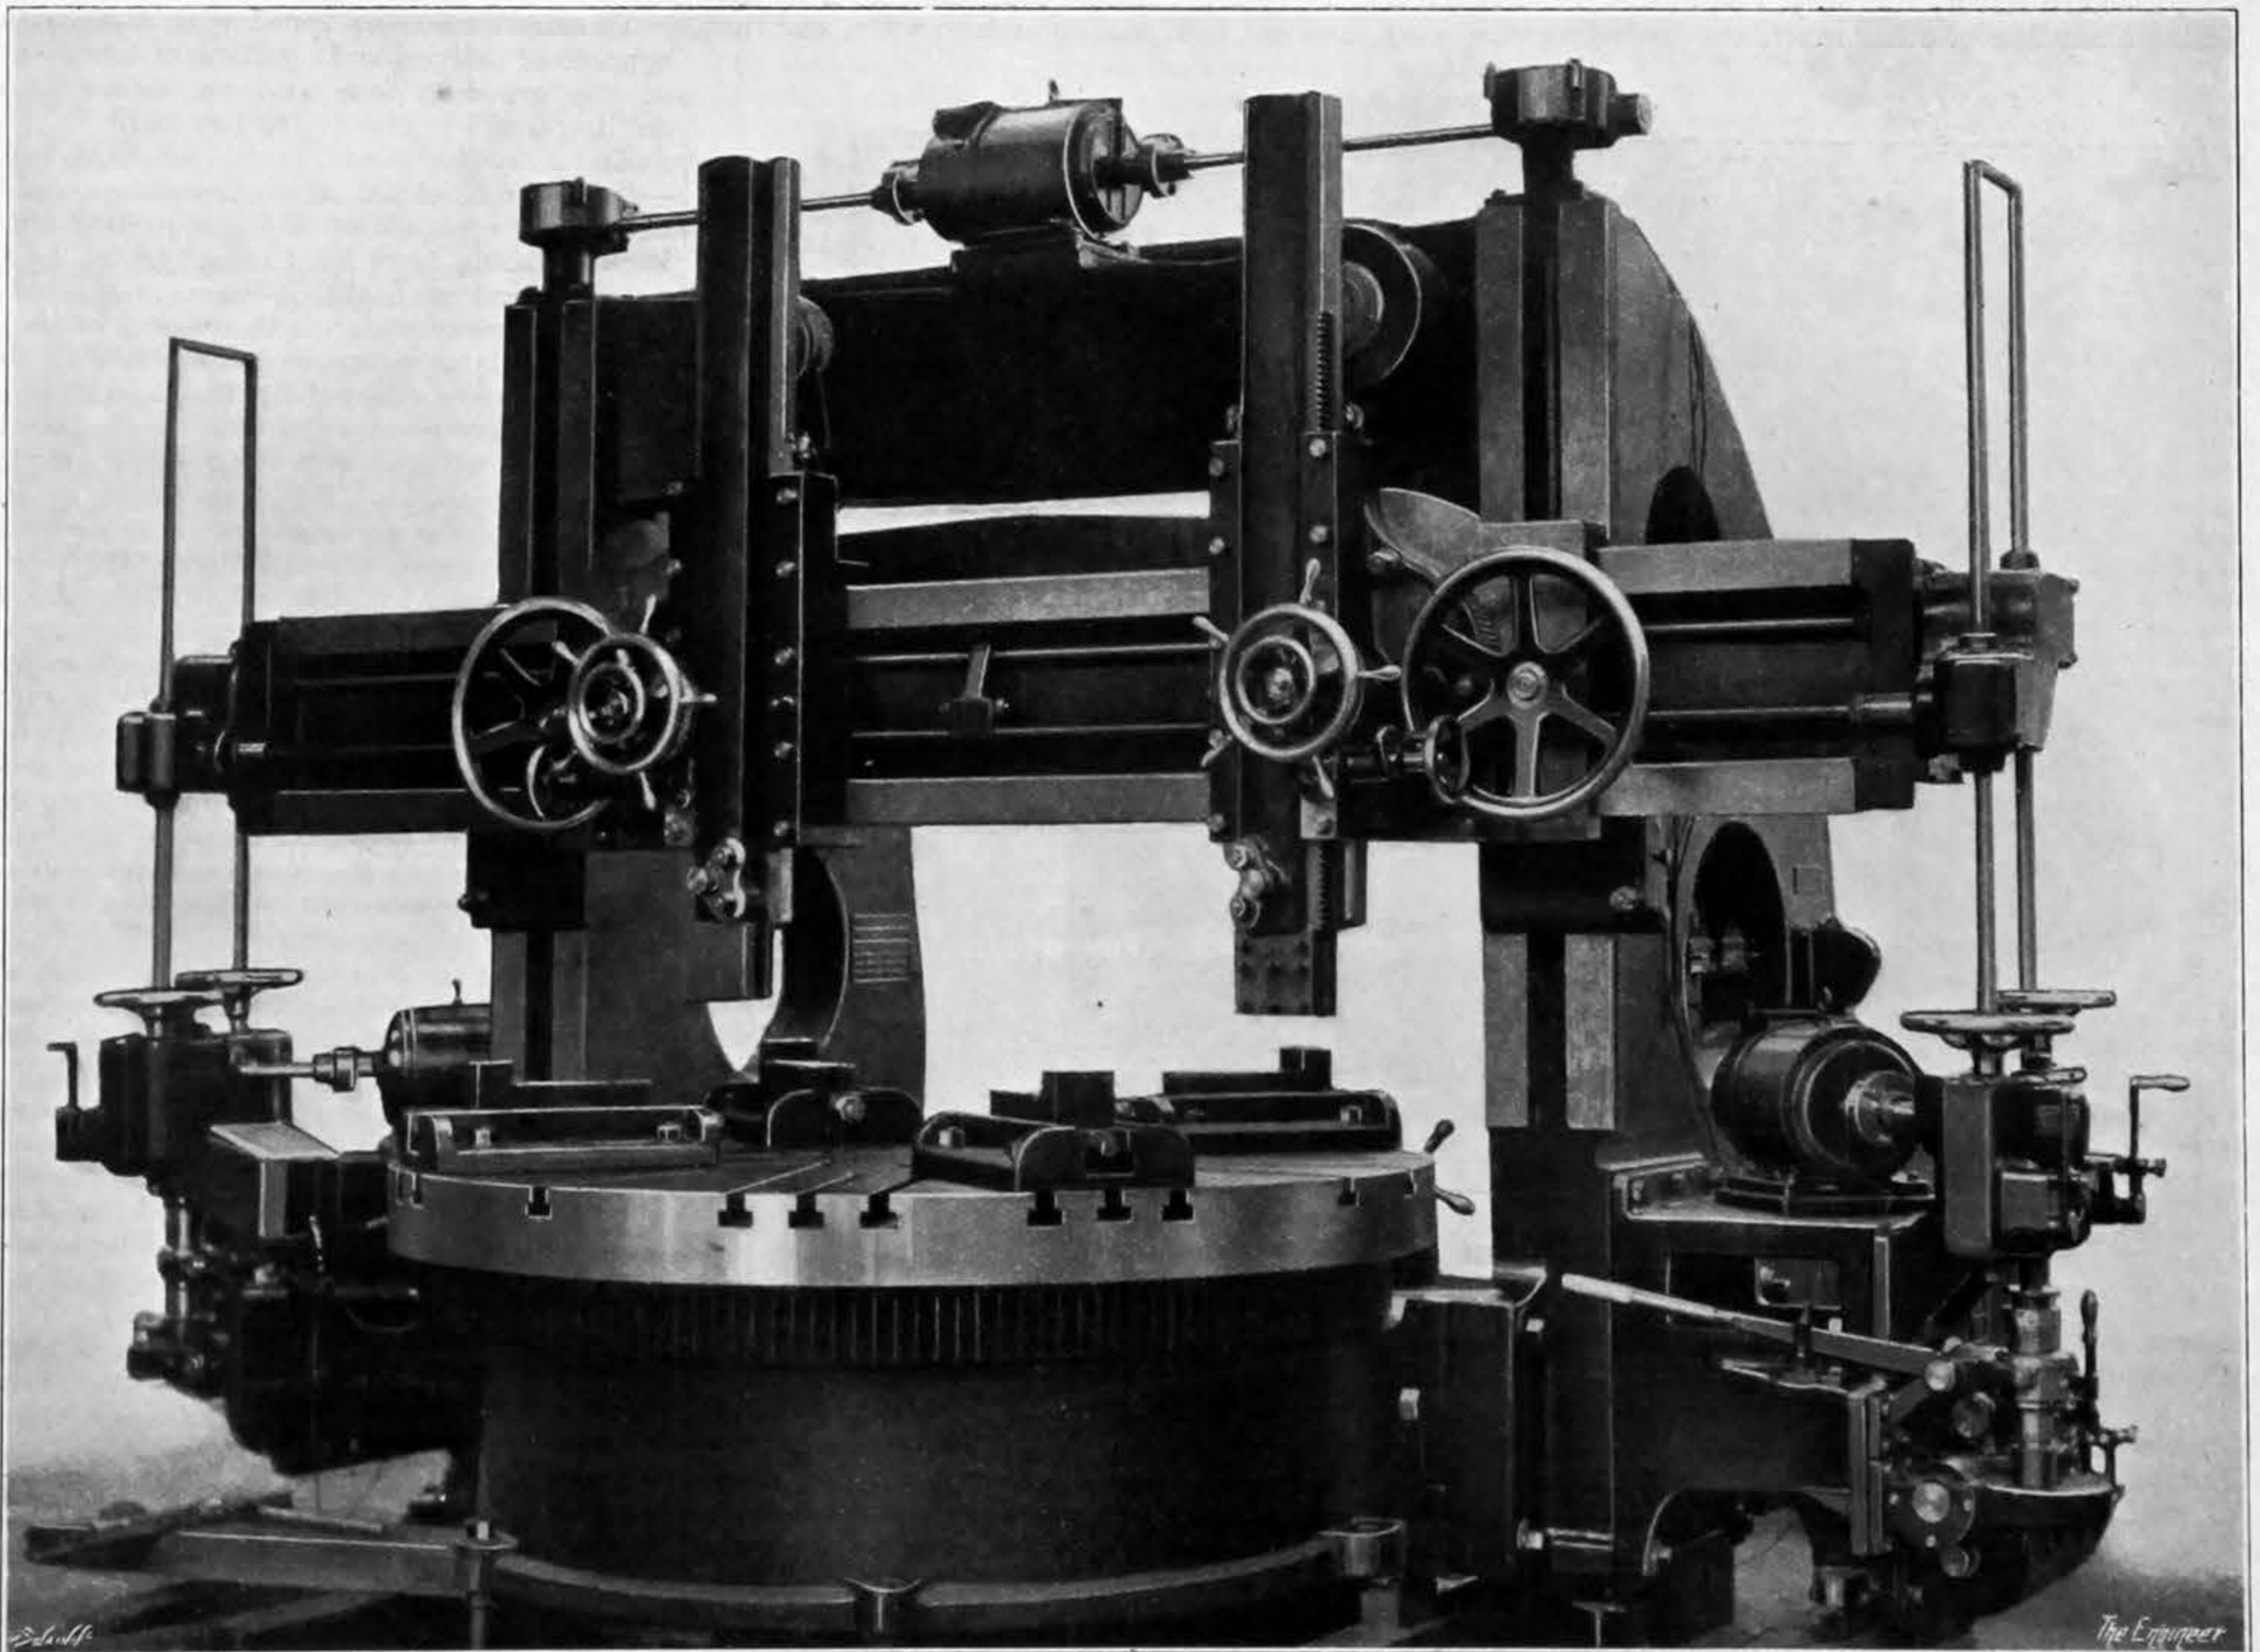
THE HILOMILL ELECTRICALLY - DRIVEN BORING AND TURNING MILL—STIRK
